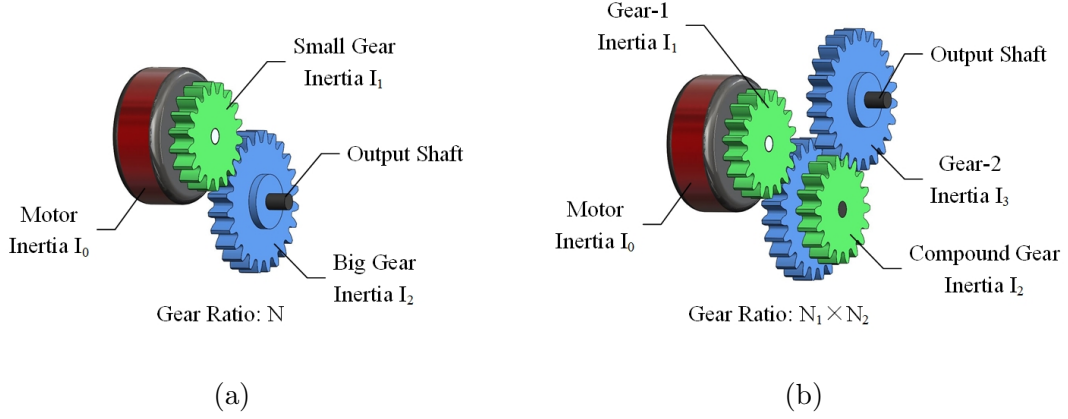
Schematic drawing of motor with one stage gear train and two stage gear train.
